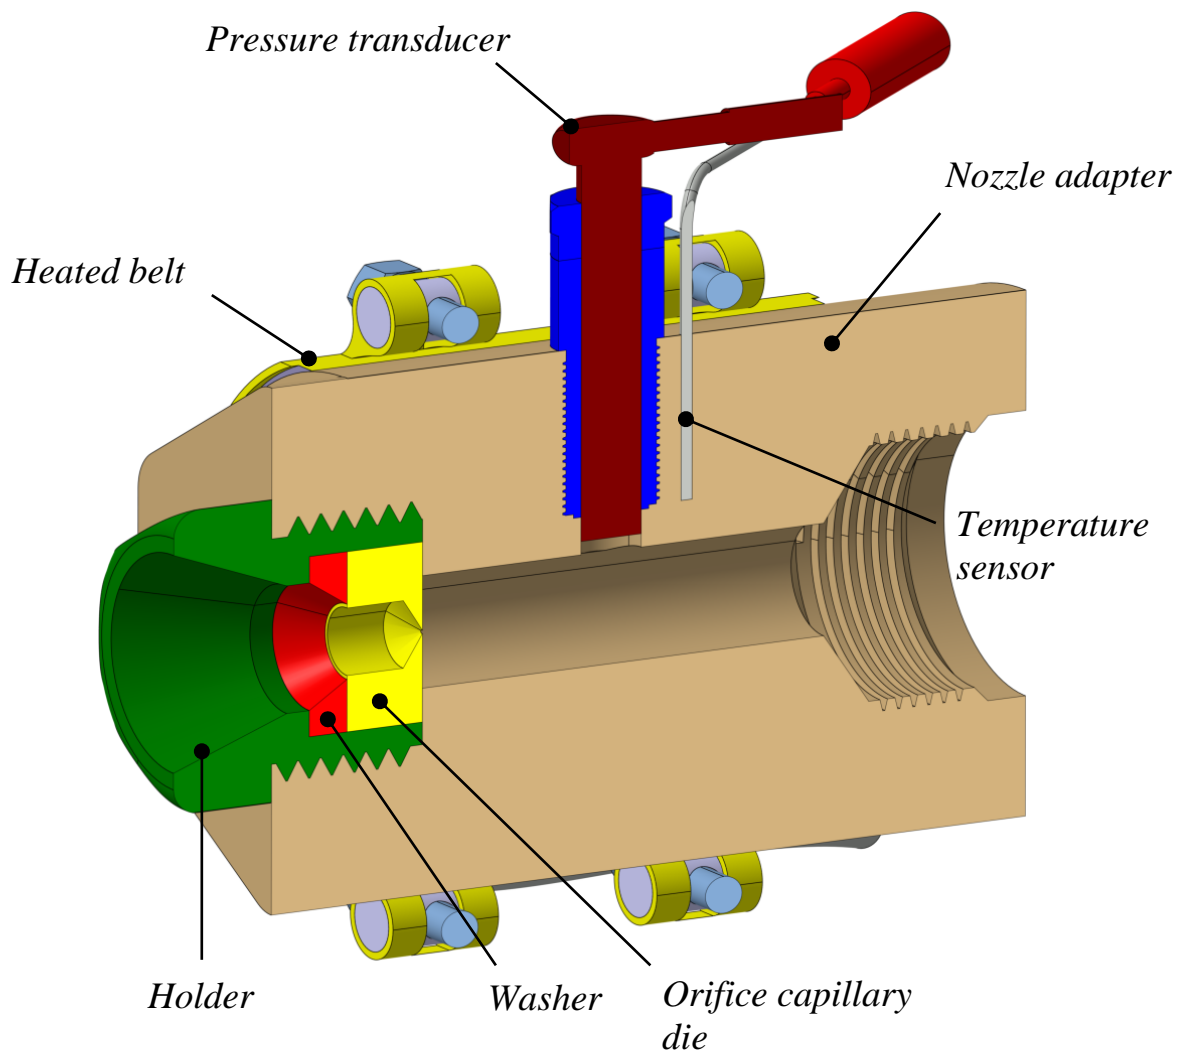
Cross-section of assembled parts for the instruments injection molding machine
